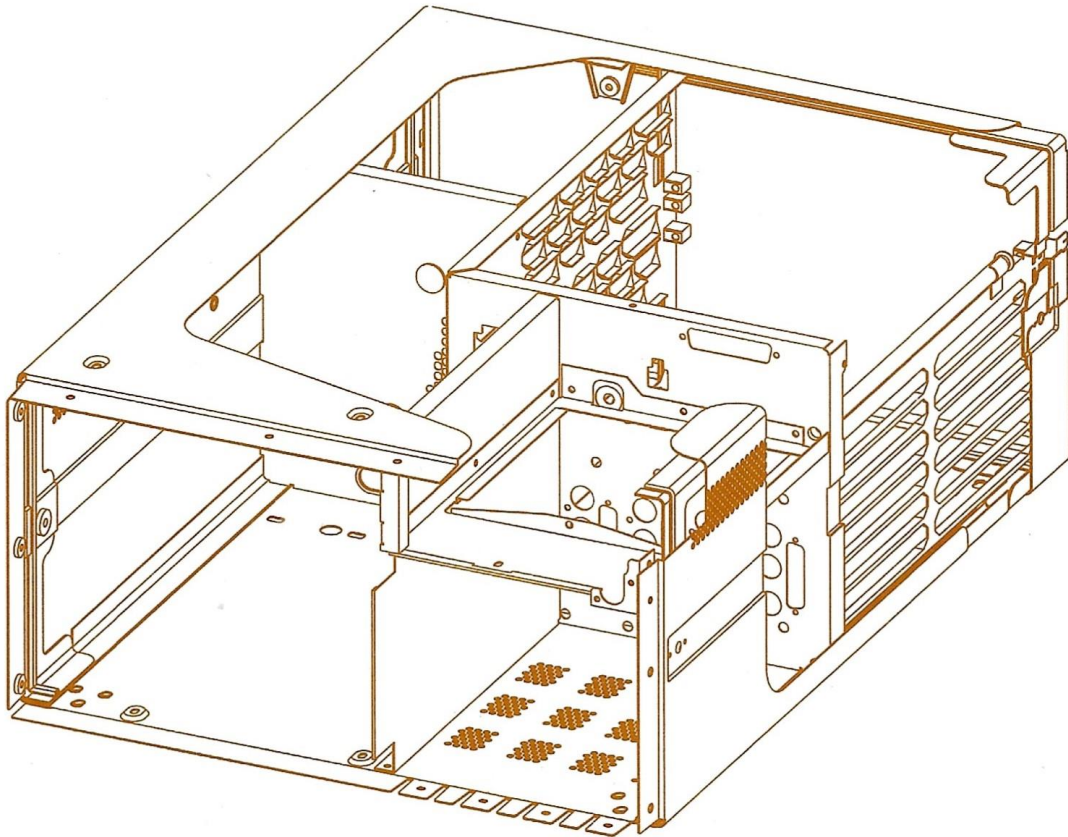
View of the oscilloscope cabinet from the front. Internal compartment elements and the external cosmetic shell are welded into a single structure. Clockwise from the left front are compartments for the display, the fan, the cardcage, and the plug-ins. The compartment at the right front above the plug-ins houses the plug-in fan and disk drive.
